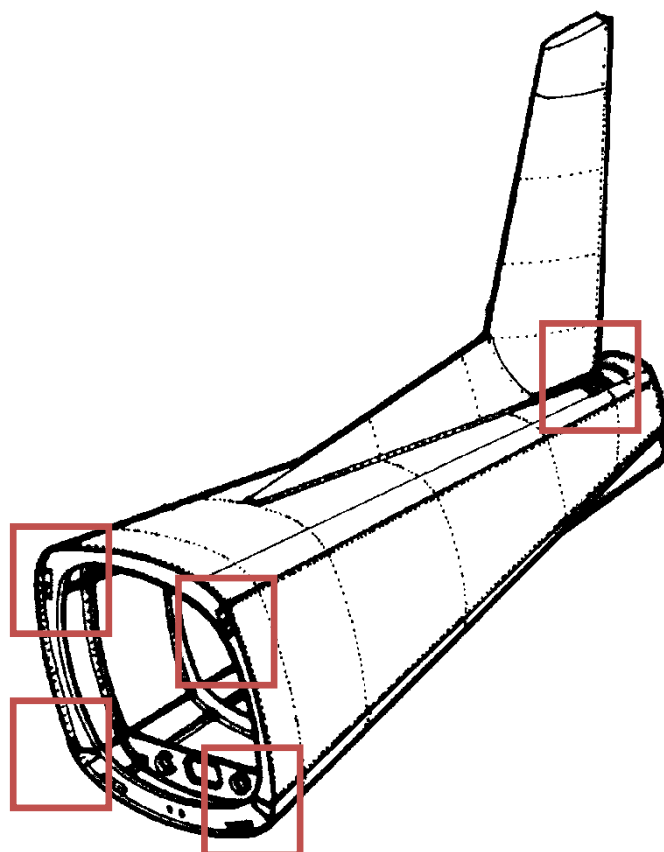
; Fuselage rear part of the Z 242L aircraft with market areas for visual inspection check
